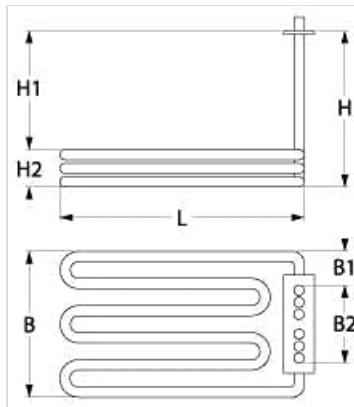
Dimensional drawing of the FriFri Fryer Heater, showing various measurements including length (L), width (B), heights (H, H1, H2), and flange dimensions (B1, B2).
